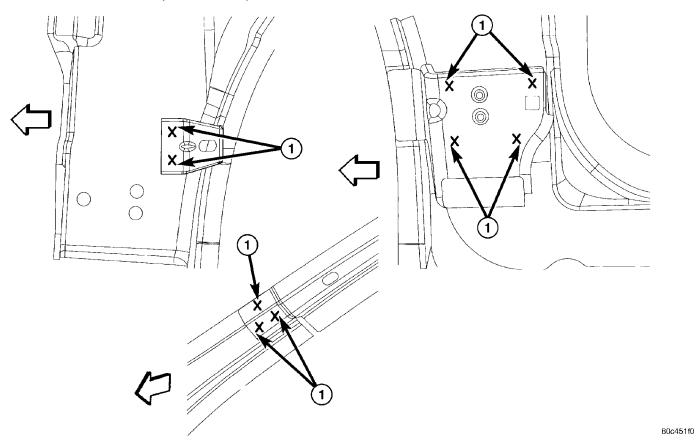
WINDSHIELD OUTER FRAME AND LOWER HINGE PLATE TO FRONT HINGE PILLAR
